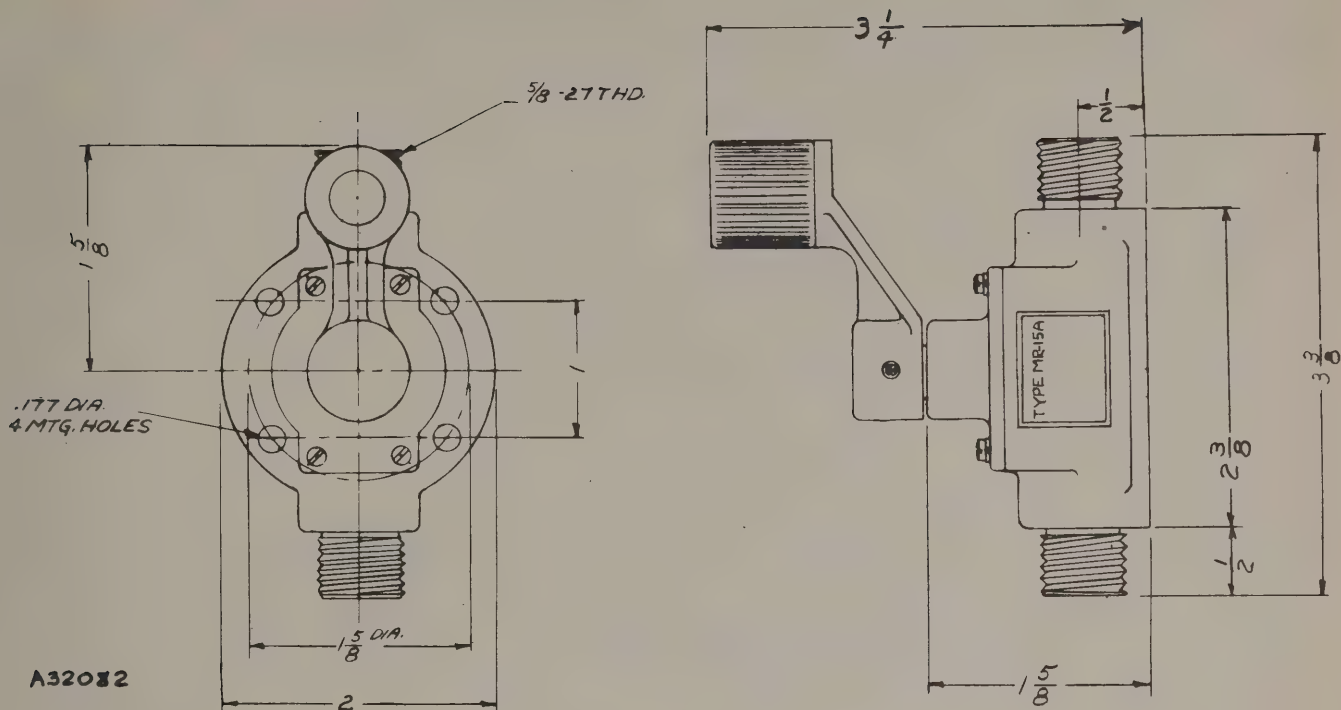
Type MR-15A Crank Drive, Outline and Mounting Dimensions
